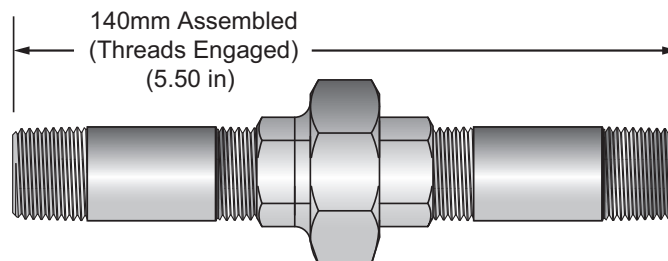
FLS Fluid Seal Fitting and OS Spring-Loaded Oil Seal are used for transmitter assemblies with thermowells and assemblies with fixed immersion sensors (it is not used with WORM sensors). It prevents fluid leak along the sensor sheath so it's ideal for using temperature sensitive paste or heat transfer fluid in the thermowell. It can also be used in air ducts and other applications. Although the FLS provides adjustment precision, it crimps the sensor sheath, and can therefore be adjusted only once (up to 0.50 in).
